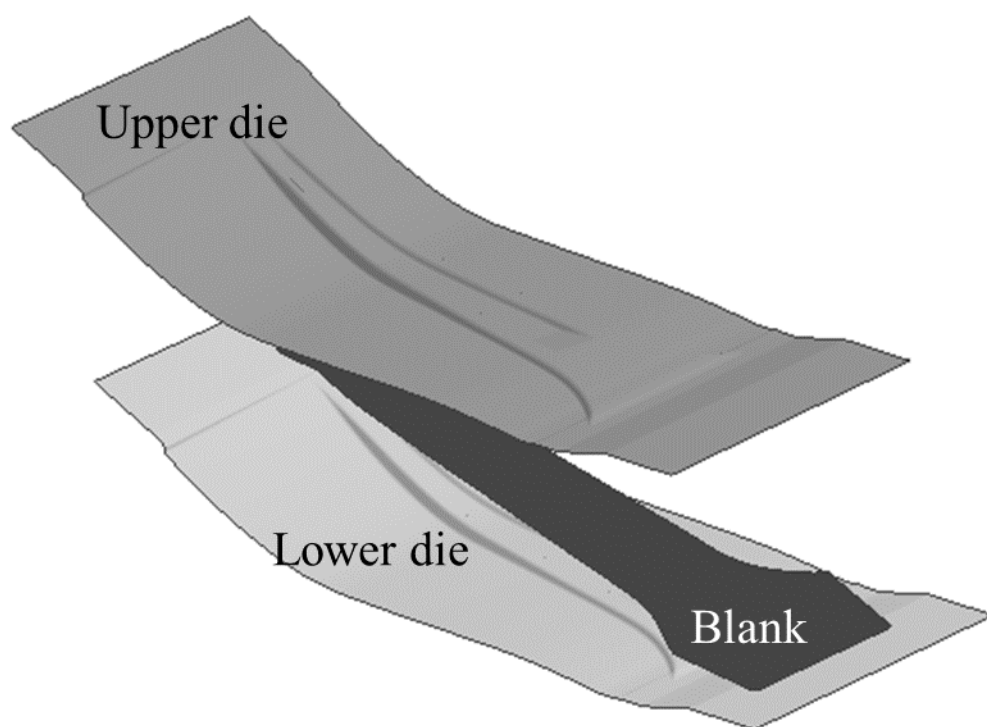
Shapes of forming dies and blank in press-forming of center pillar inner
